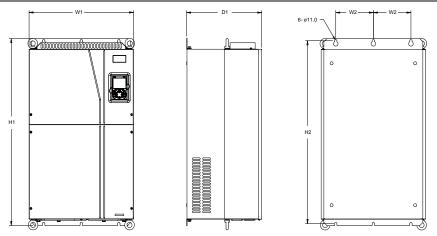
Wall installation diagram of inverters of 460V 132-200kW
